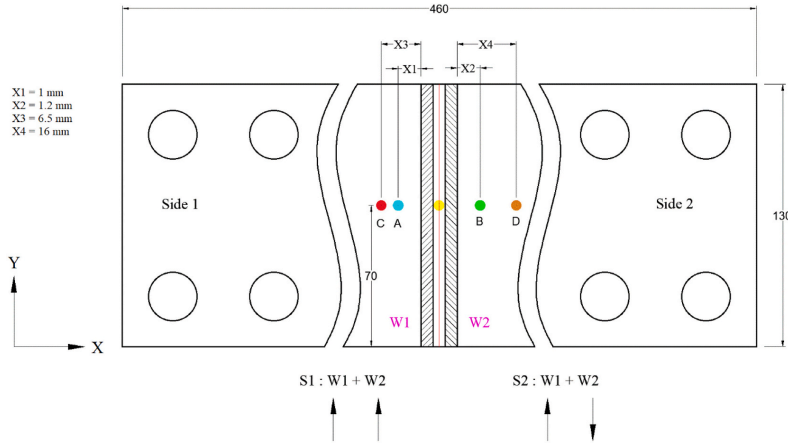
Specimen configuration, positions of thermocouples and illustration of applied welding sequences. (Units in mm).
